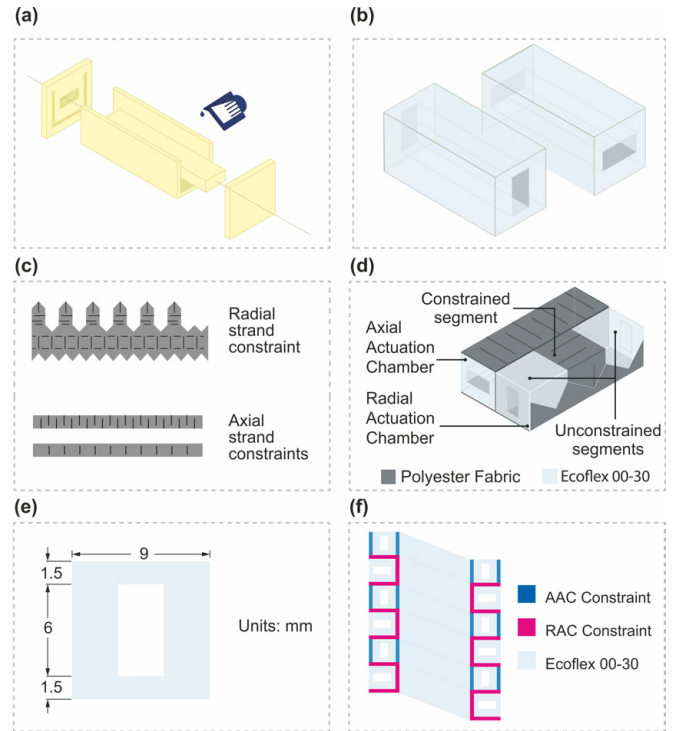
Fabrication steps. (a) Design of the mold, which is made up of four parts that connect mechanically to create a hollow rectangular prism that shapes the basic structure of the pneumatic chambers; (b) the pneumatic chambers resulting from molding; (c) 2D representation of the polyester constraints for both chambers; and (d) configuration in which the polyester constraints are placed and embedded in the pneumatic chambers. The top view represents the outer surface view when these chambers are placed in helical configuration; (e) cross-sectional dimensions of the chambers; and (f) cross-sectional view of the entire helical structure. AAC and RAC are interlayered after being helically coiled in a supportive tube.
